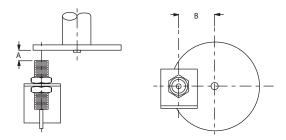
Standard 906 Sensor with 255 Pulser Disc
